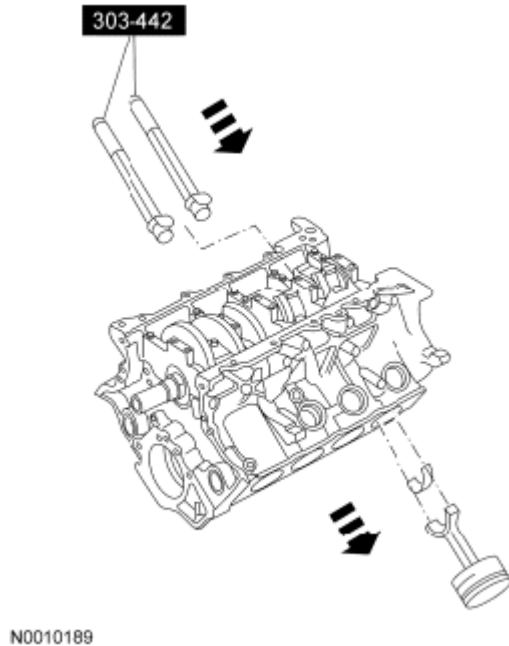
Pushing Piston Through Top Of Cylinder Block
